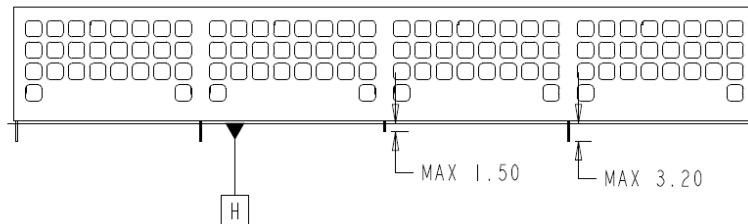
Side view of a 1x1 cage with vertical cage dimensions
